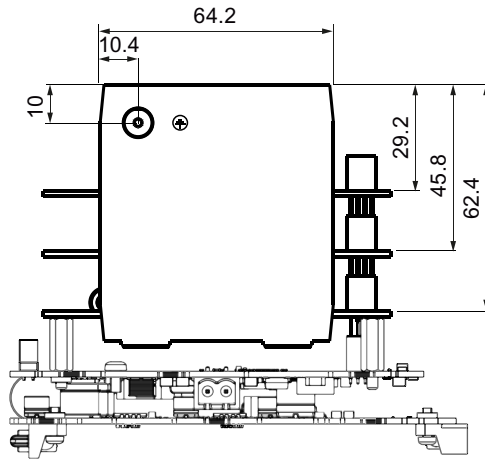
Spacing between the PCI-104 cards (dimensions in mm)
